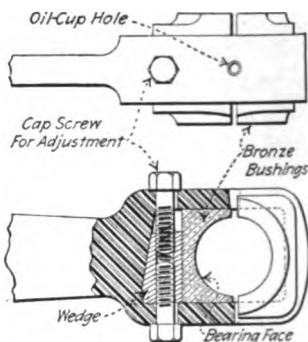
Bronze-bushed connecting-rod bearing. Closed-end type.
